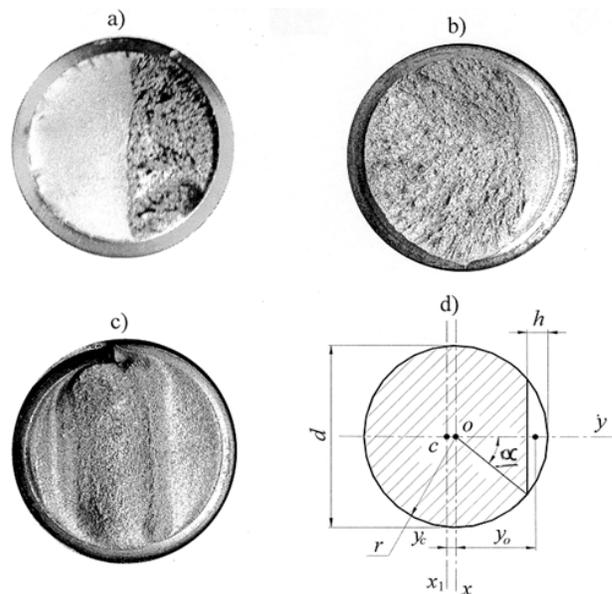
The breaks view of a stud-bolt with crack: (a) and (b) crack is on one side of stud; (c) crack is on two side of stud; (d) model of cross-section
